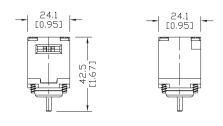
Fully turnable 360° head - SP2K120, SDM2K120 models
